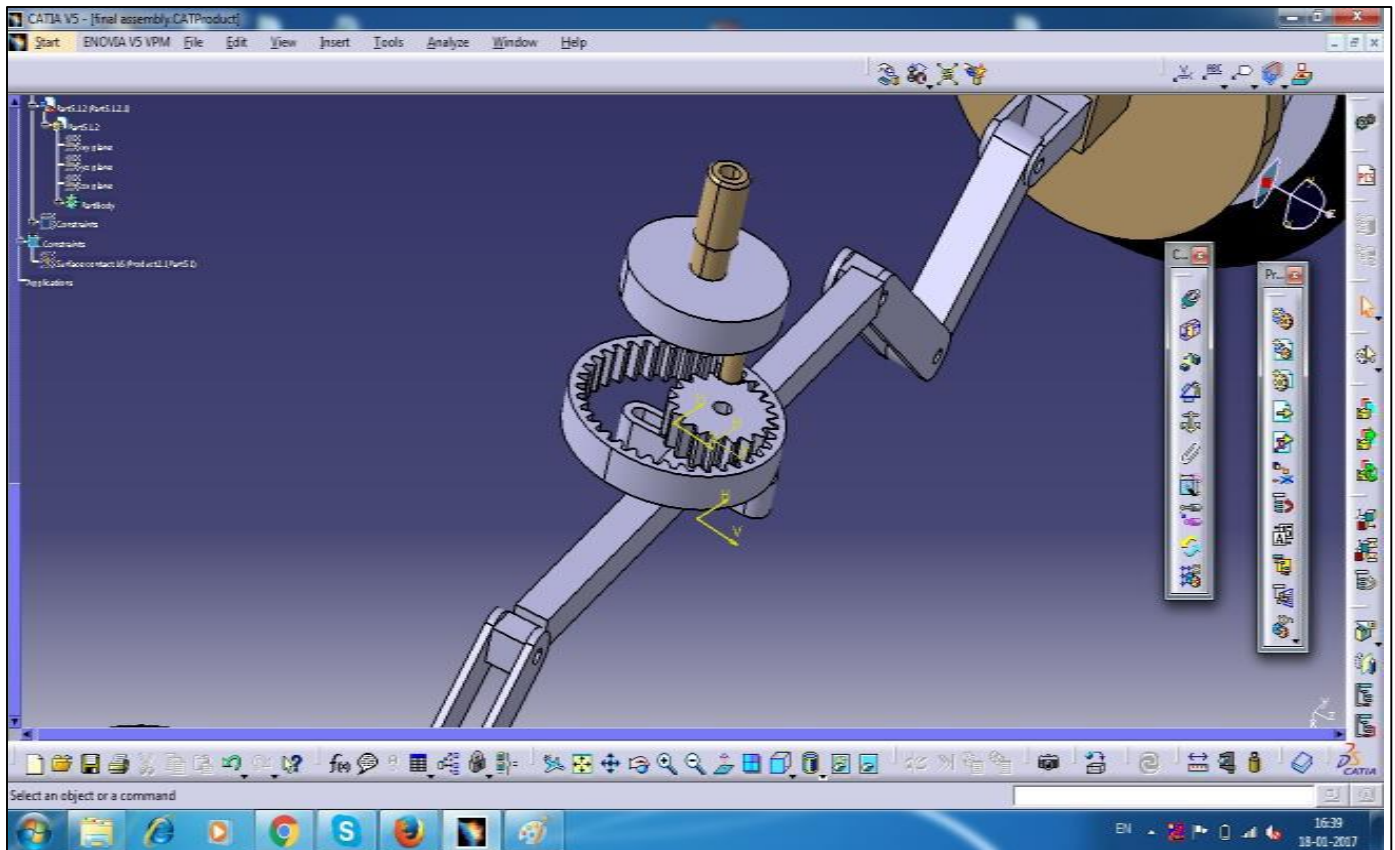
Rear Wheel 3D Catia Model (Front View)
